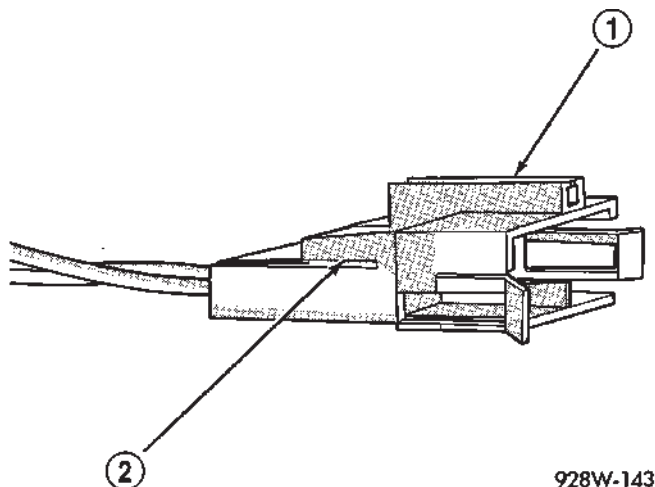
CONNECTOR LOCKING WEDGE TAB (TYPICAL)
